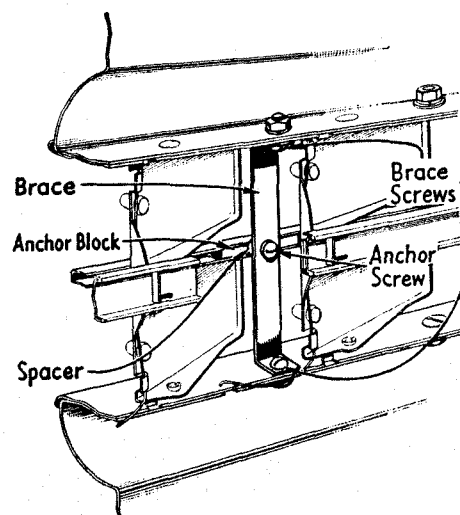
The hood port brace may be installed on later Cadillac cars without removing the hood port assembly.
